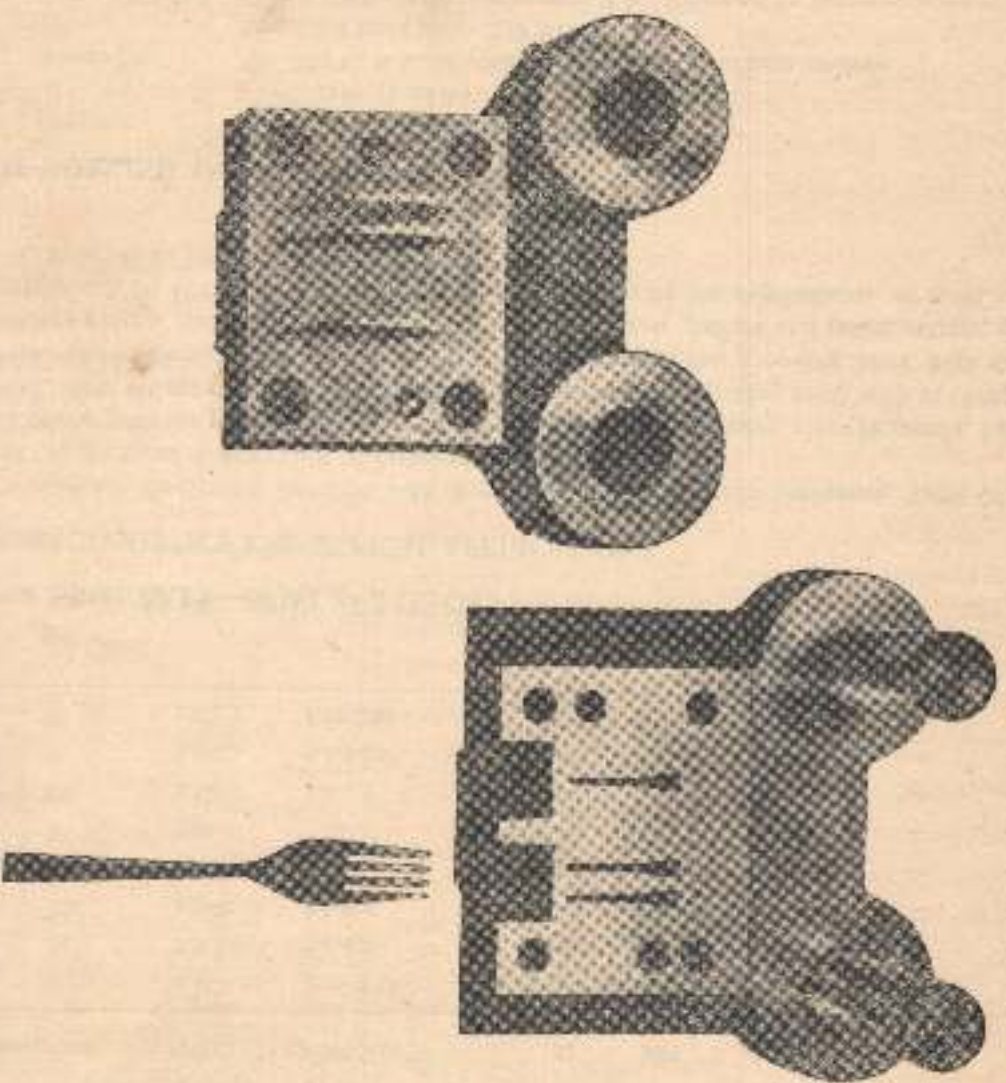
(a) Blanking tool for fork manufacture made of steel—ISO 60WCrV2 (Courtesy: VEW, Austria)
